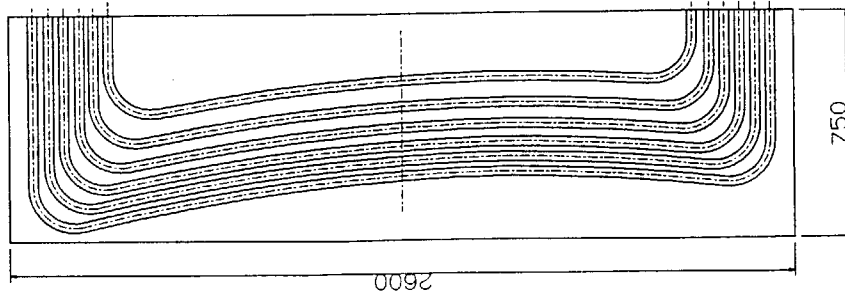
Fabrication Process of Shield Plate (HIP)
